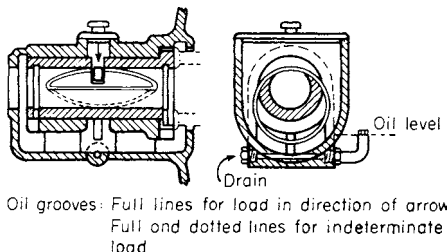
Ring-oiled bearing solid bushing.
